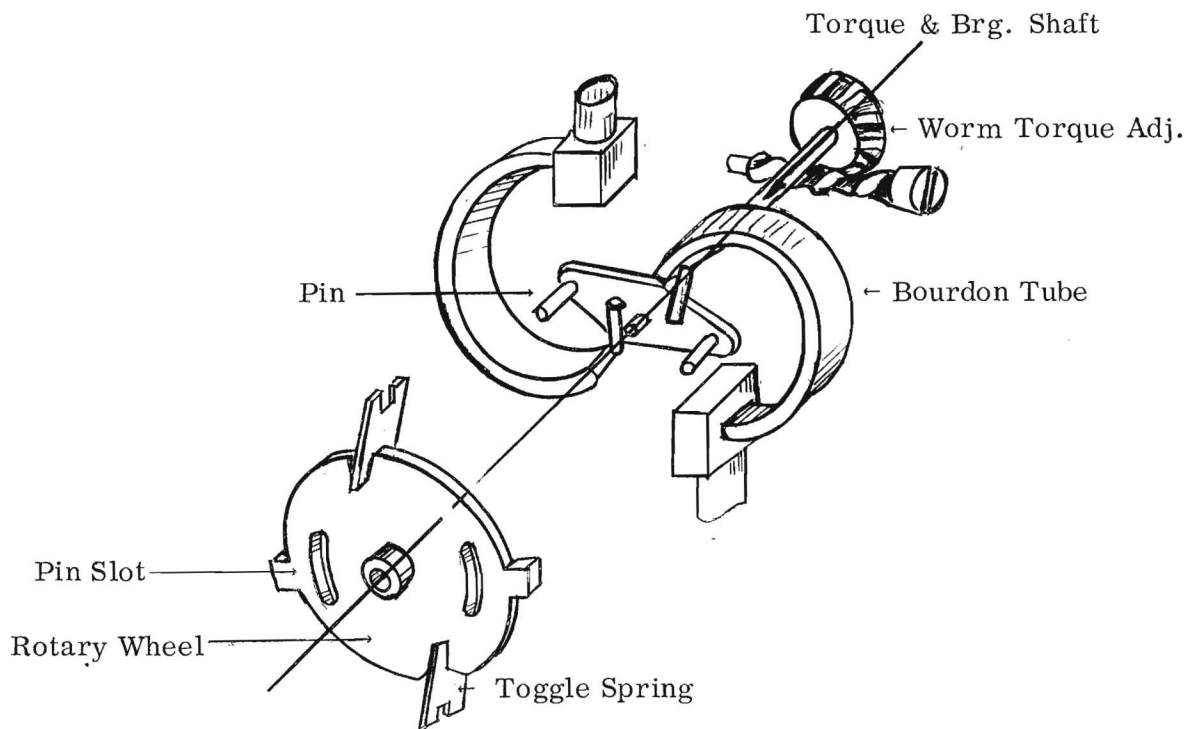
EXPLODED VIEW OF MAIN ELEMENTS
